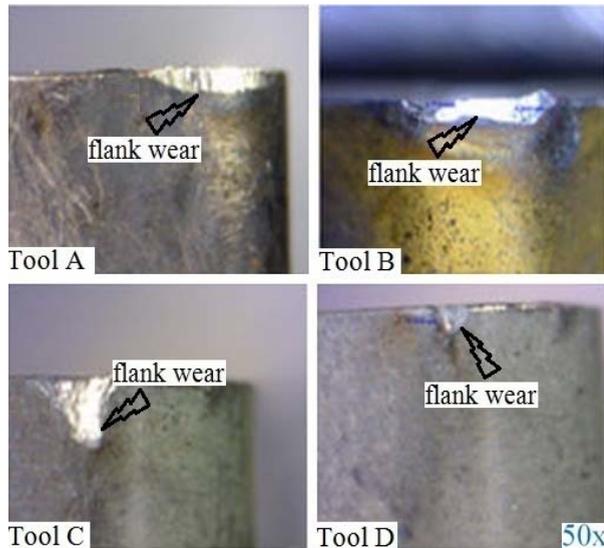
Flank wear region of alumina ceramic tools A, B, C, D
